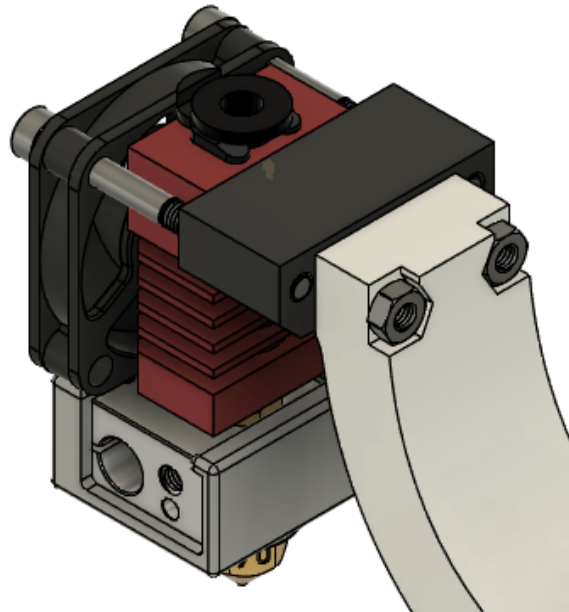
The Extruder Hot End and its Mounting to the Cantilever Arm
